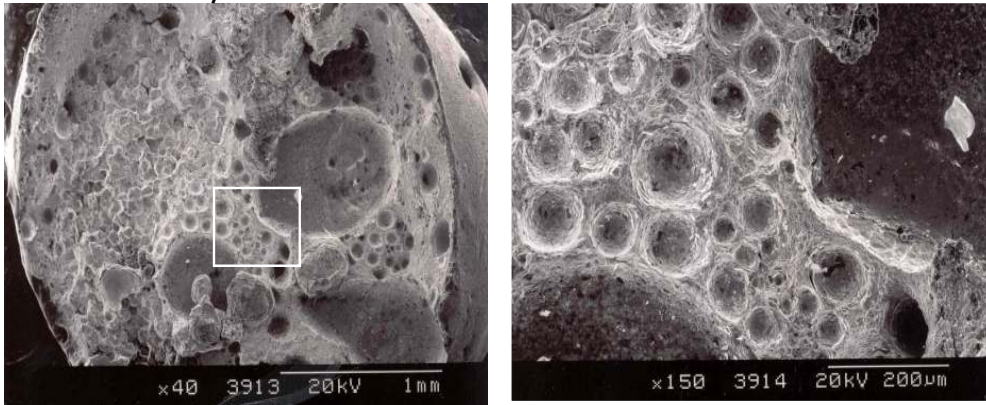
Left, low magnification SEM fractography of soldered Co-Cr/Gold specimen. Complete fusion at the center of the specimen together with many large porosity. Right, Features of dimple fracture and some porosity are present.
